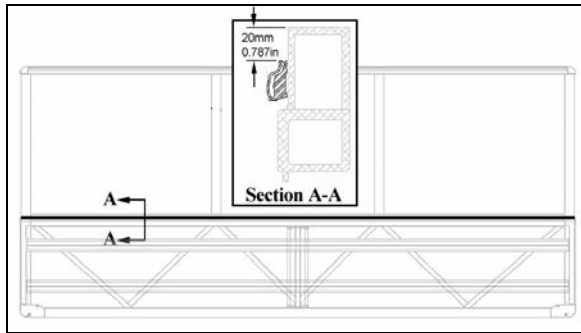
FACE FIXED WINDOWS - RUBBER SEAL INSTALLATION
